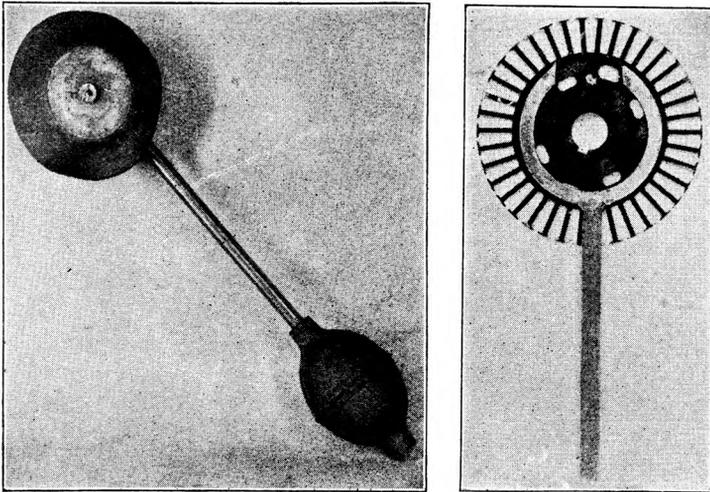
Special hand tools for feeding presses. Special hand tool A is connected to vacuum air line. Button on handle (B) controls flow of air. (Par. 238.)
